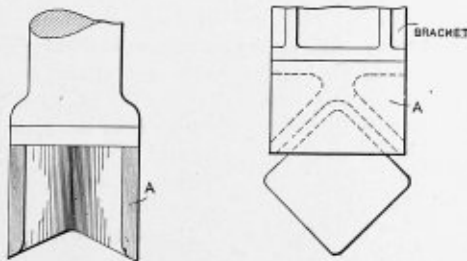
FORMERS FOR FLANGING SQUARE CORNERS.
